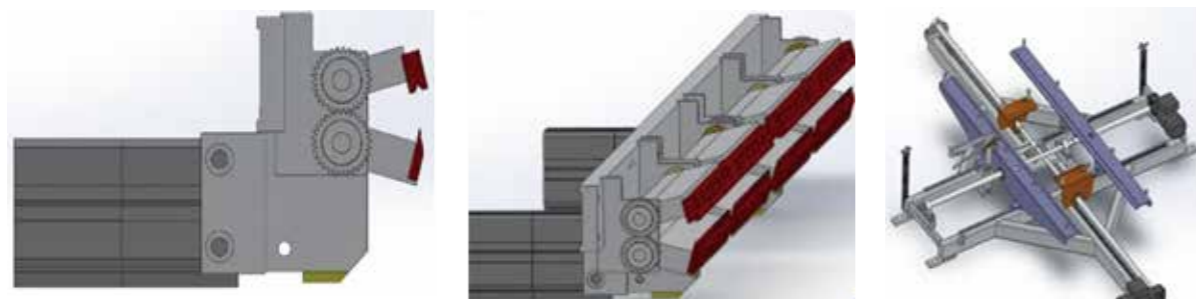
DETAILS FOR KCM VACUUM FORMING MACHINE BY TECHNICAL DESCRIPTIONS AS BELOW:
